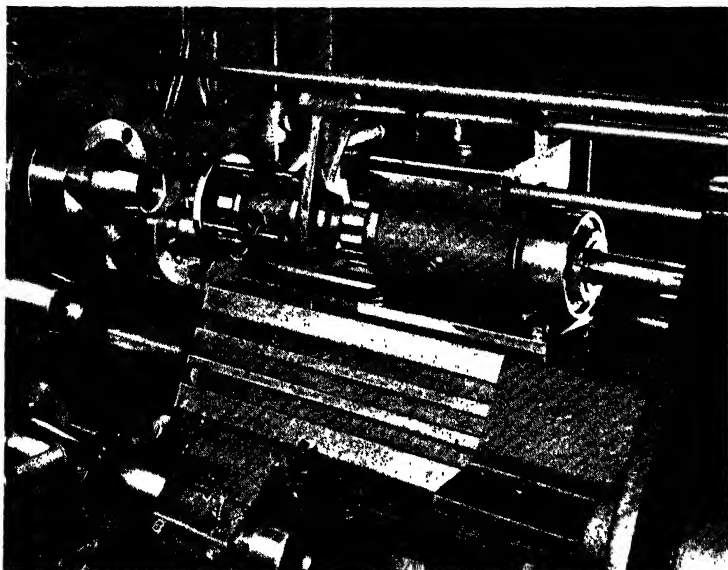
Six-spindle Automatic Counterboring, Recessing, Threading and Chamfering Open Ends of the Shells
